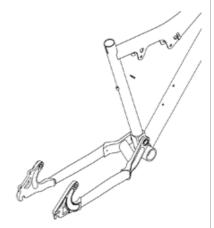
Chainstay (5) and ASR Front Triangle (1) with main bearings (7), button head bolts (19), and flat washers (12, assembled
